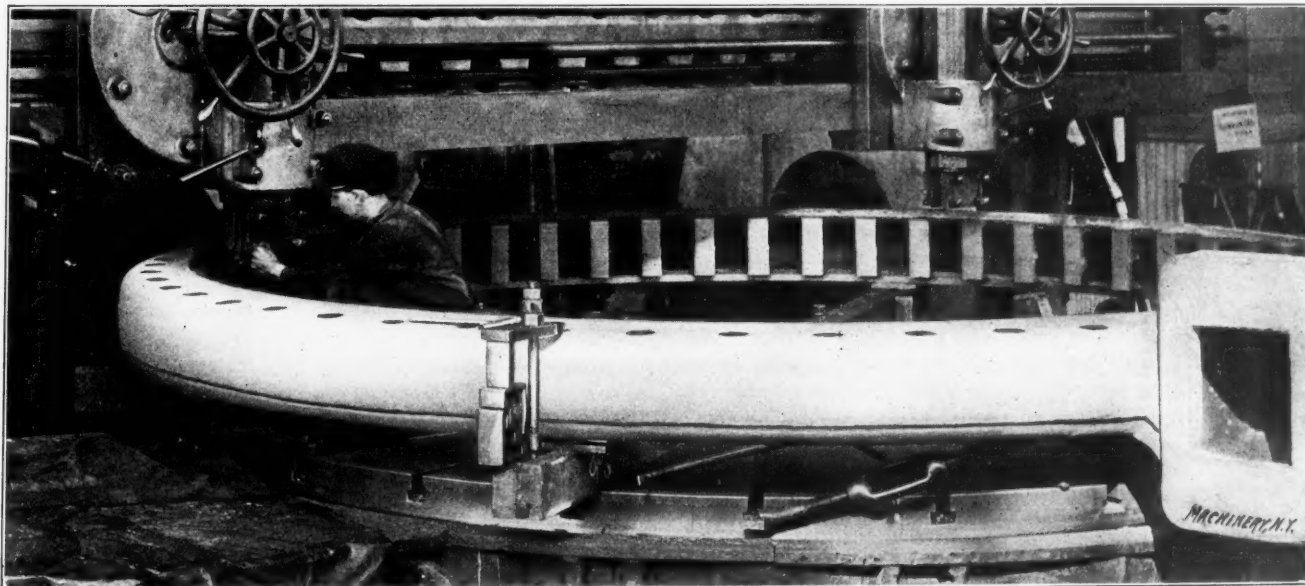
Generator Frame on Boring Mill Table, showing Method of Holding Work.
